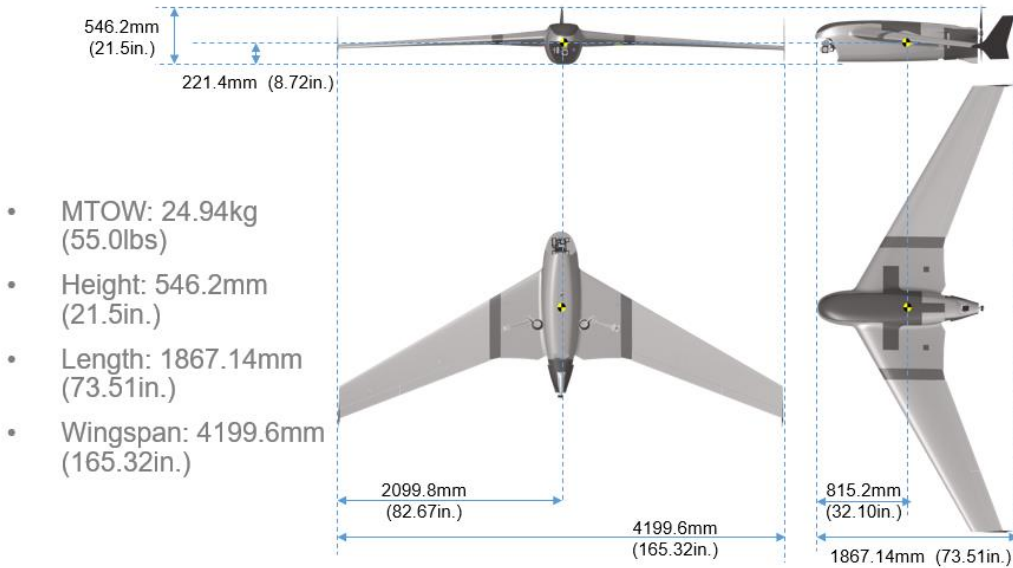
Fixed-wing overall dimensions, MTOW, and c.g. location.
